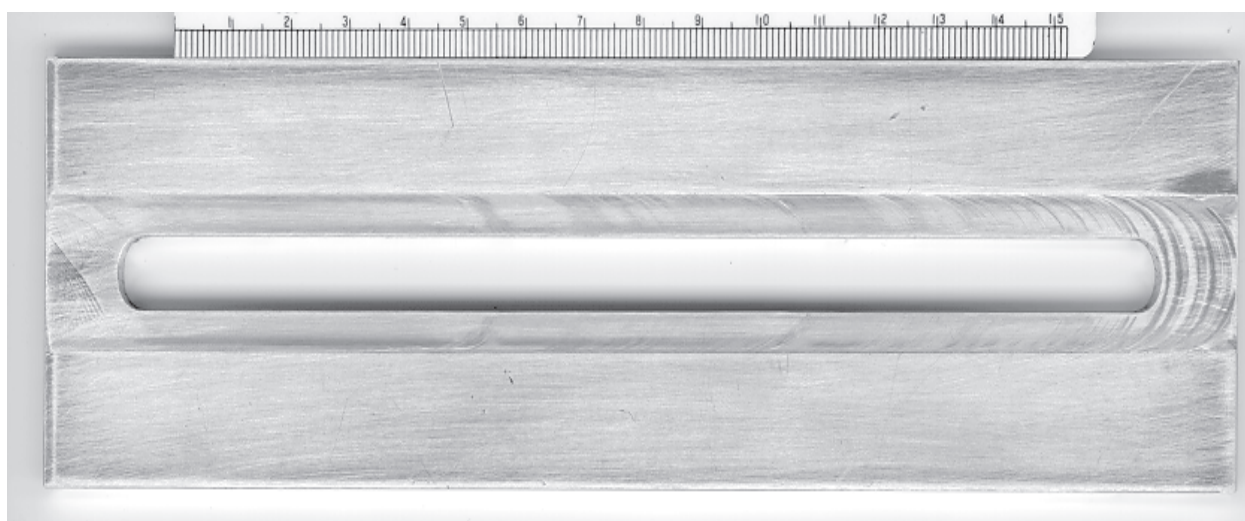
Aluminum base plate showing the slot and milled trough that accommodates the pen holder.
